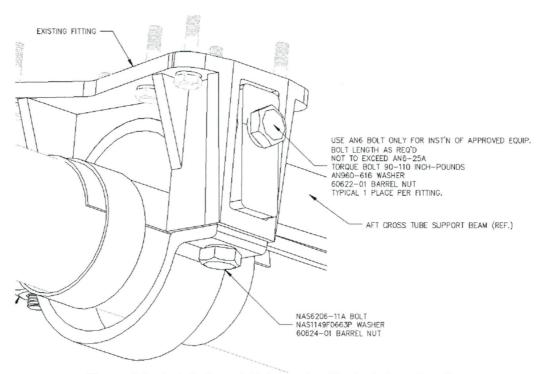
Installation of Aft Mounting Blocks in Landing Gear
